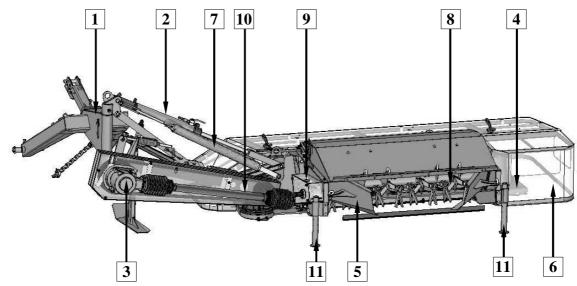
Parts of SaMASZ rear disc mower with tine conditioner
